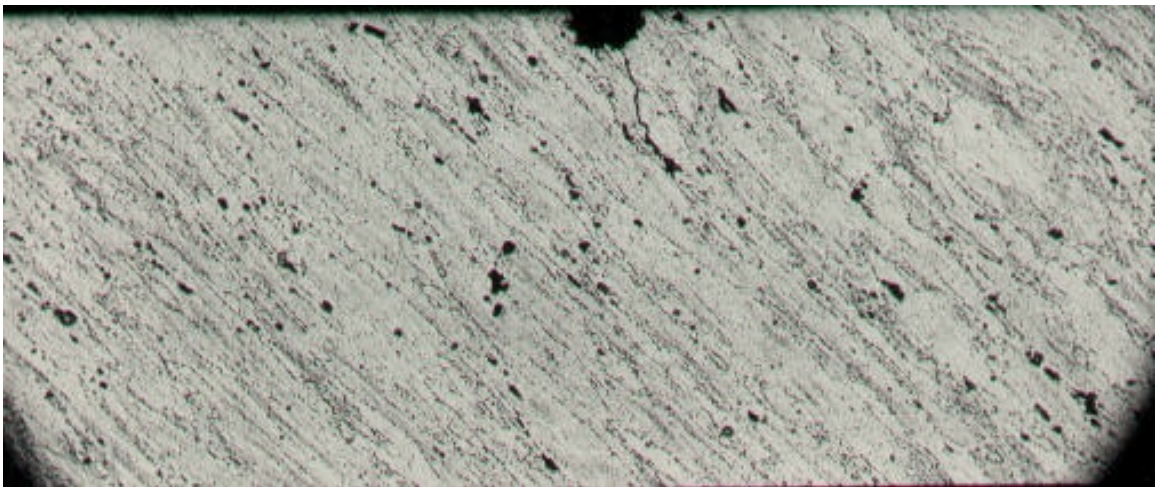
A transverse section of a pit on the inner surface of the shock-strut cylinder.
